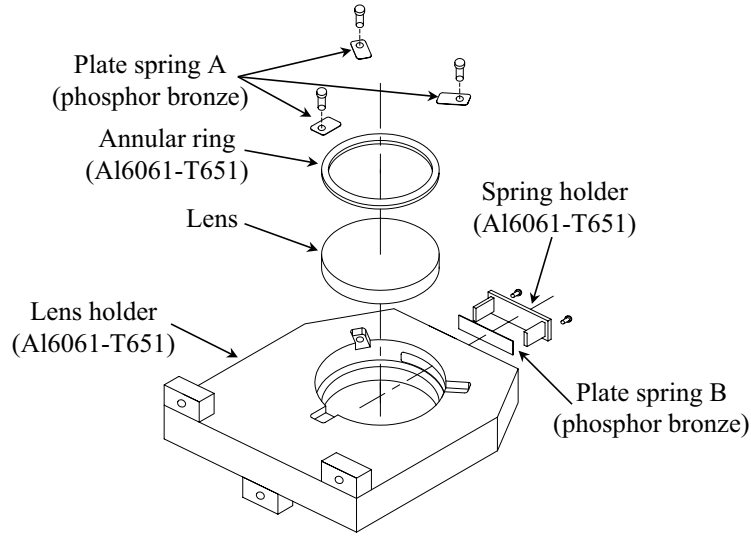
Layout of the mounting mechanism of the lens. Plate spring A and B push the lens to each direction against the contact surface of the mount. Plate spring A are screwed on the mount, while plate spring B is pushed by spring holder which is screwed on the mount. The mount is fixed on the optical bench by three tabs shown in bottom left.
